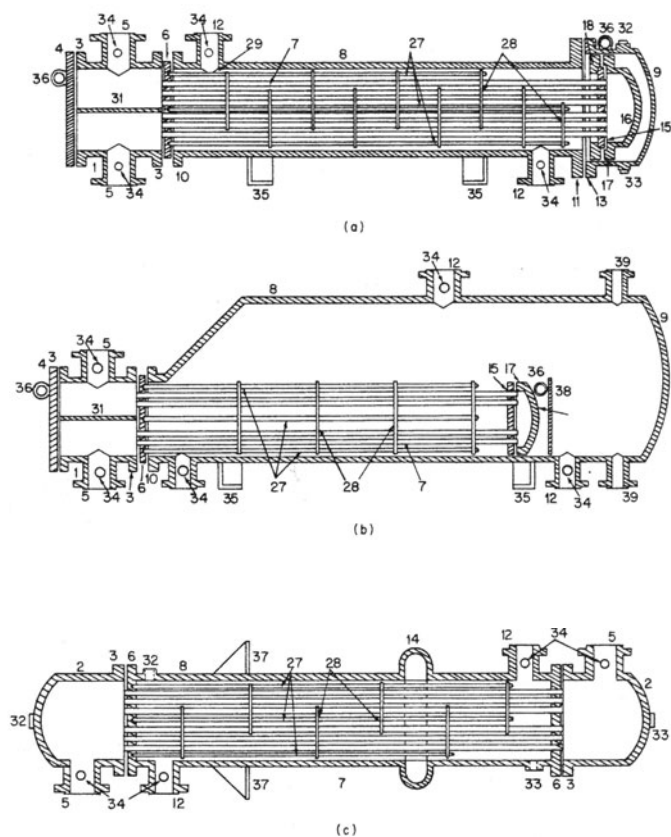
Three common types of shell-and-tube heat exchangers: (a) Type AES, internal-floating-head exchanger (with floating-head backing device); (b) Type AKT, kettle-type floating-head reboiler; and (c) Type BEM, fixed-tube sheet exchanger. (Sketches adapted from specification diagrams from the Standards of Tubular Exchange Manufacturers Association.) Legend: (1) Stationary head, channel, (2) stationary head bonnet, (3) stationary-head flange, channel, or bonnet, (4) channel cover, (5) stationary-head nozzle, (6) stationary tube sheet, (7) tubes, (8) shell, (9) shell cover, (10) shell flange, stationary-head end, (11) shell flange, rear-head end, (12) shell nozzle, (13) shell cover flange, (14) expansion joint, (15) floating tube sheet, (16) floating-head cover, (17) floating-head flange, (18) floating-head backing device, (19) split shear ring, (20) slip-on backing flange, (21) floating-head cover, external, (22) floating tube sheet skirt, (23) packing-box flange, (24) packing, (25) packing follower ring, (26) lantern ring, (27) tie rods and spacers, (28) transverse baffle, (29) impingement baffle, (30) longitudinal baffle, (31) pass partition, (32) vent connection, (33) drain connection, (34) instrument connection, (35) support saddle, (36) lifting lug, (37) support bracket, (38) weir, and (39) liquid-level connection.
